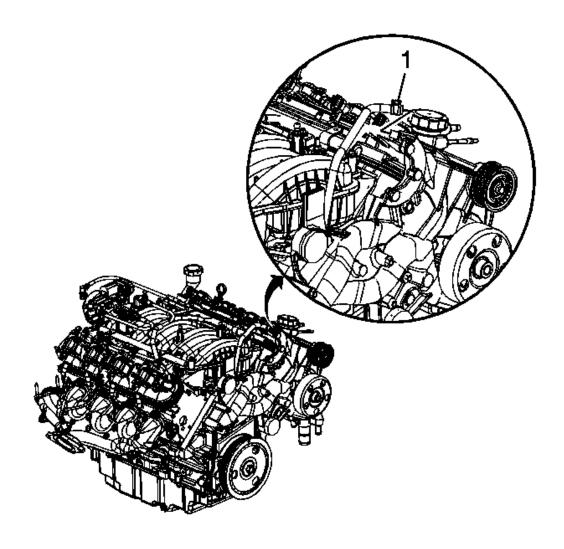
Engine Coolant Air Bleed Hose And Clamp Courtesy of GENERAL MOTORS CORP.
